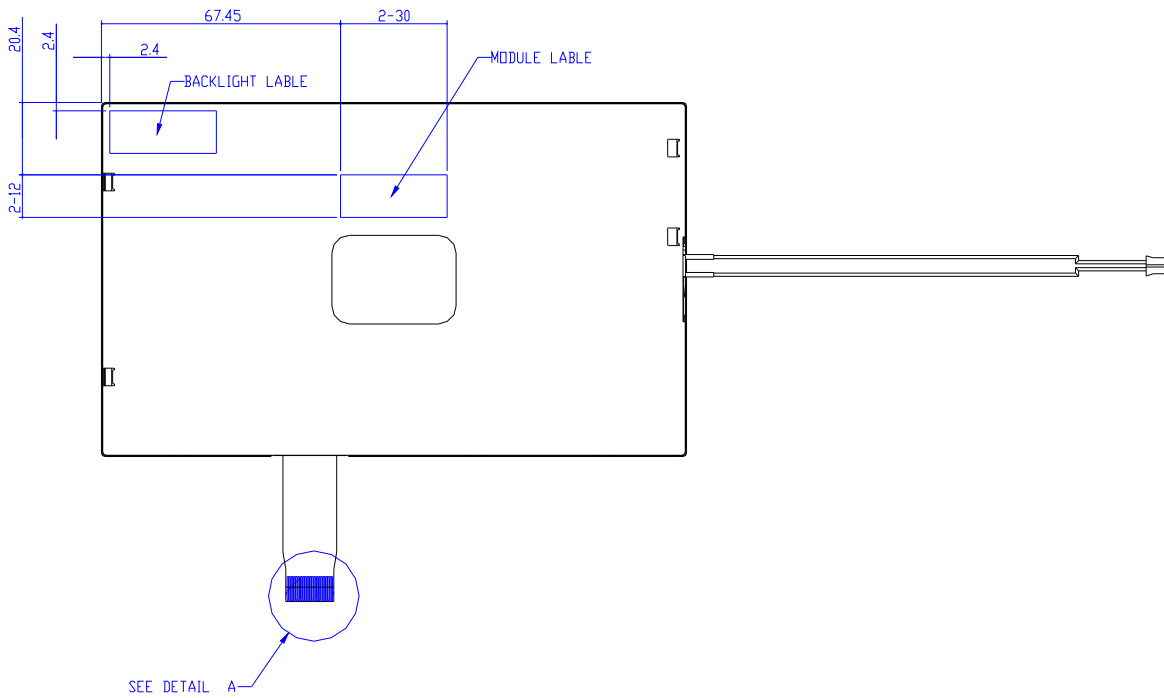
(a) Outline dimension of TFT-LCD module (Front)
